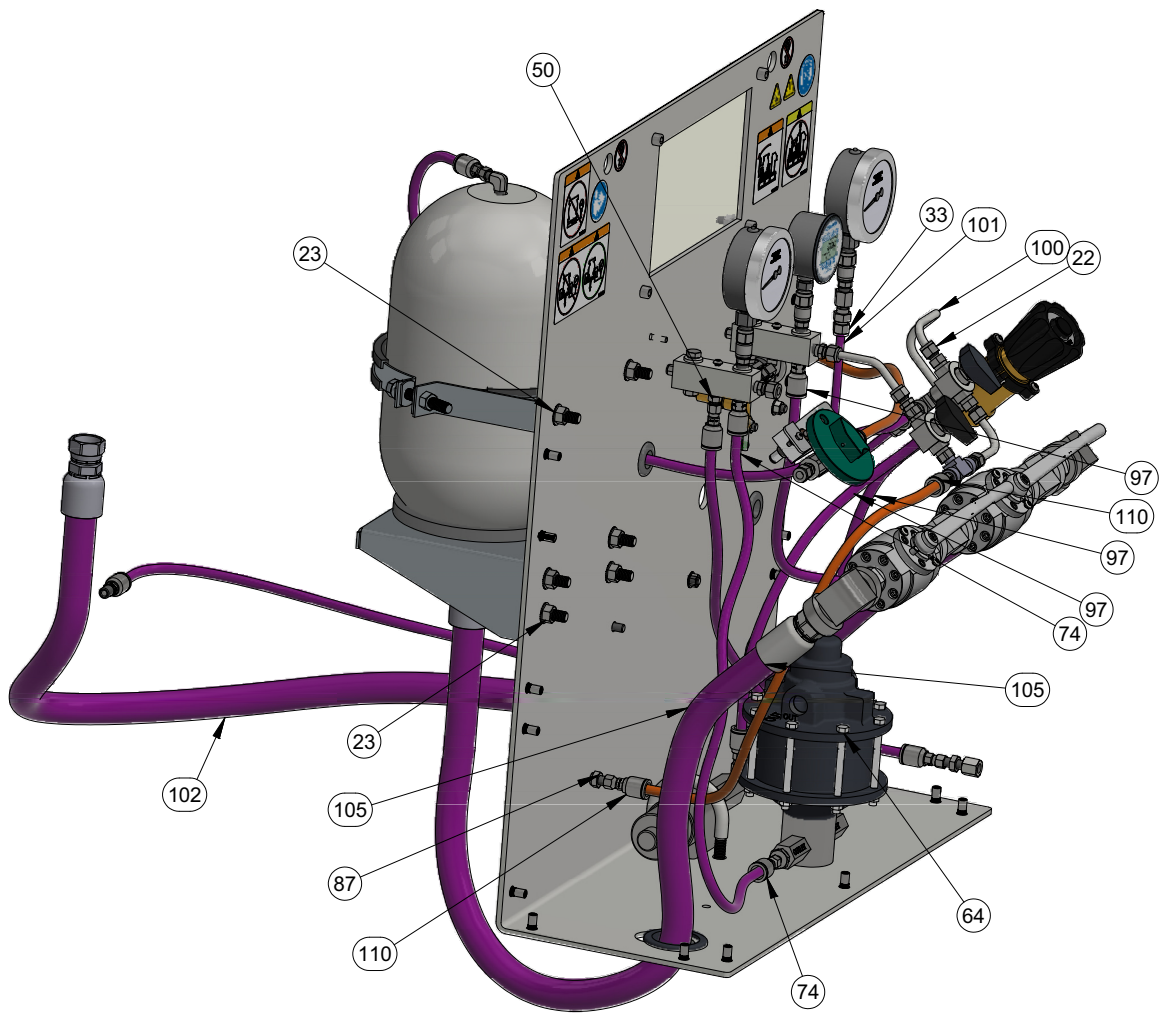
CONSOLE HOSE ASSEMBLY (P/N 98223)
